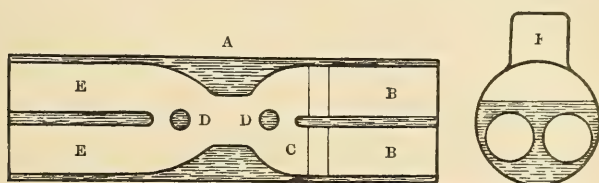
Boiler with Double Furnaces. Horizontal and Transverse Sections.
